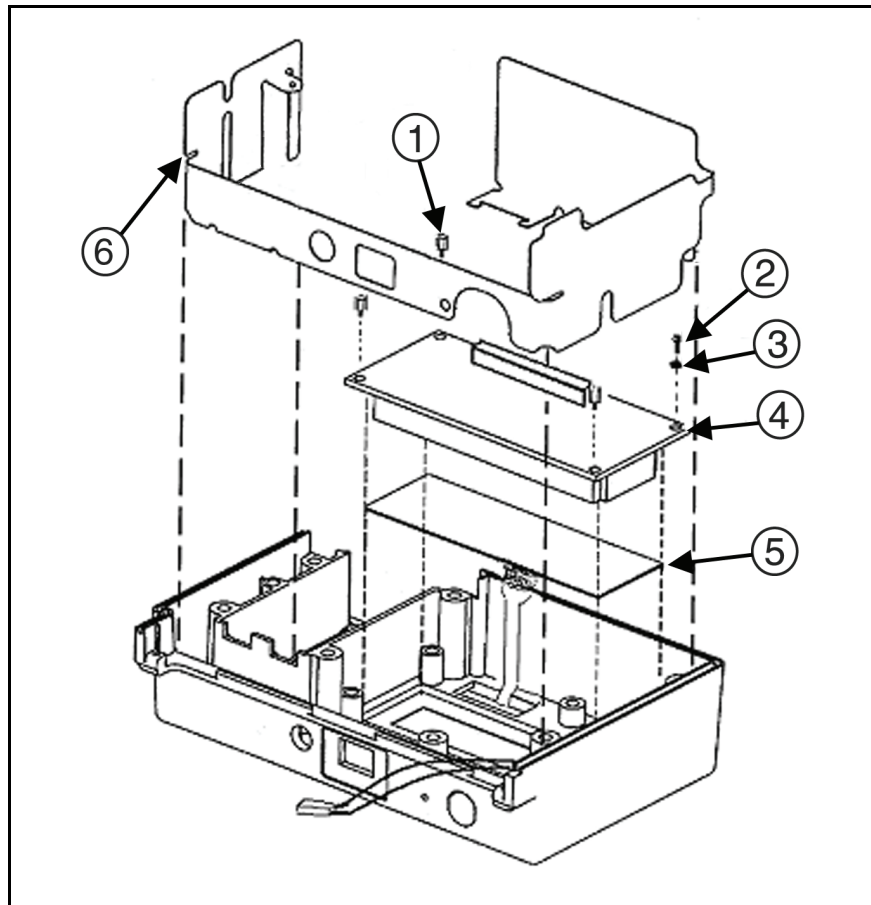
ESD Flex Circuit & LCD Module Removal
